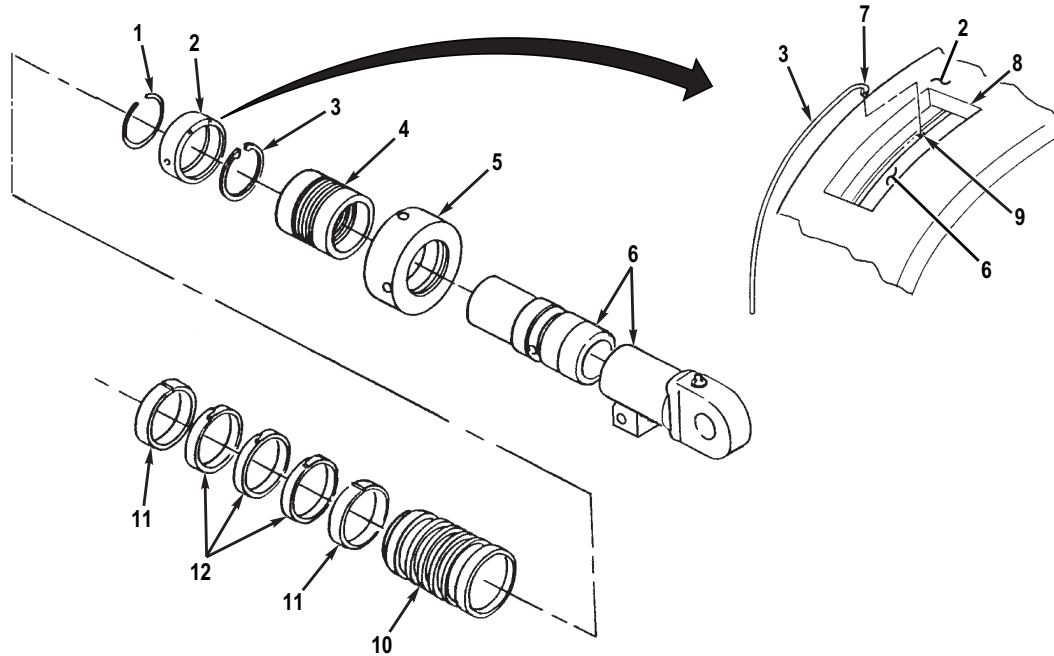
Hydraulic Lift Cylinder (with Side Lift Kit) Assembly.
